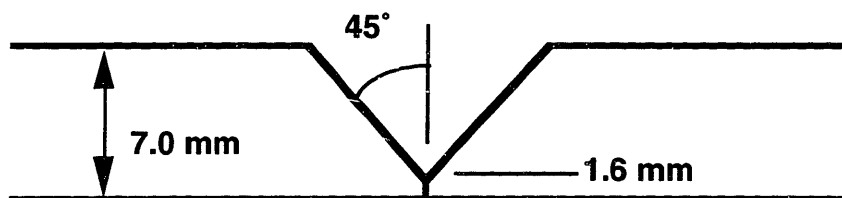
A Schematic of groove design for multi-pass manual gas tungsten arc welding.
